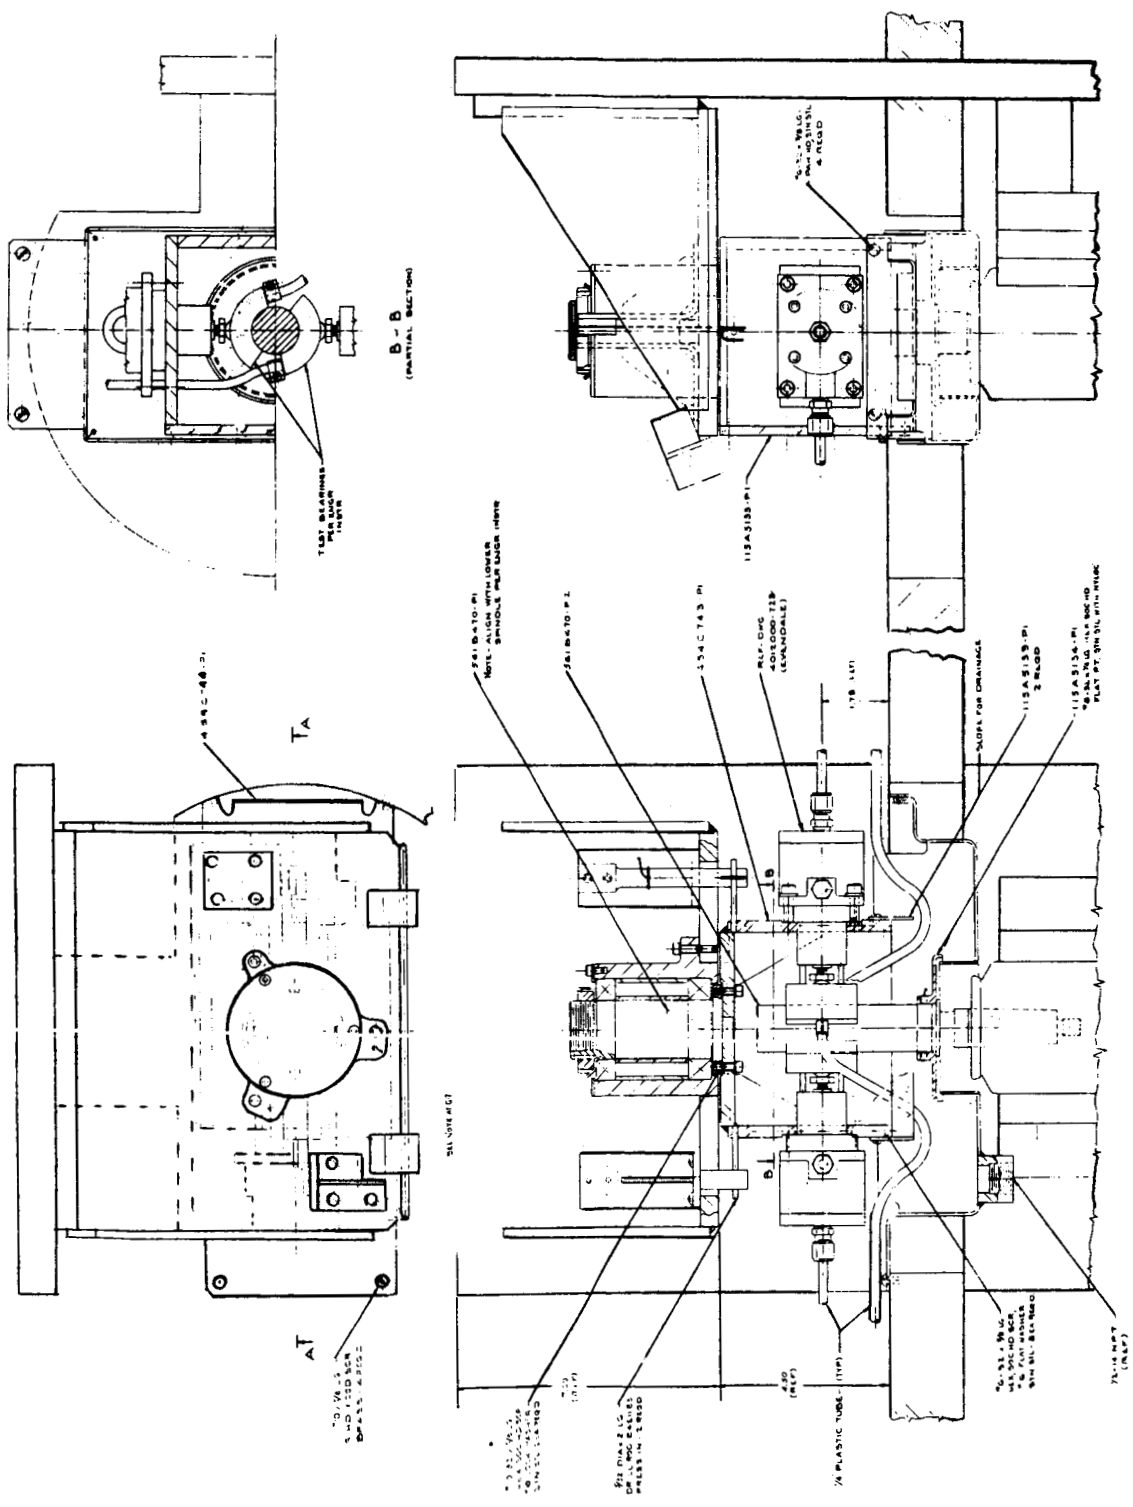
Test Rig for Measuring Loader Bearing Friction Torque.
